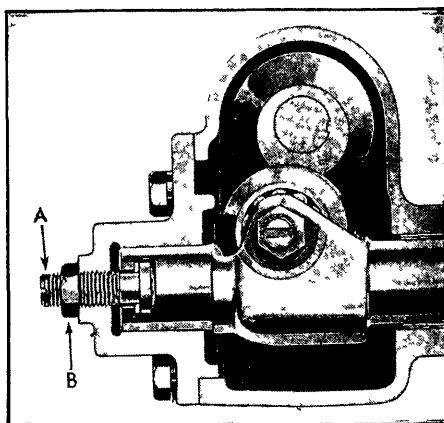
B Chevrolet 1949-52. Roller Shaft adjusting screw (A) and lock nut (B)
